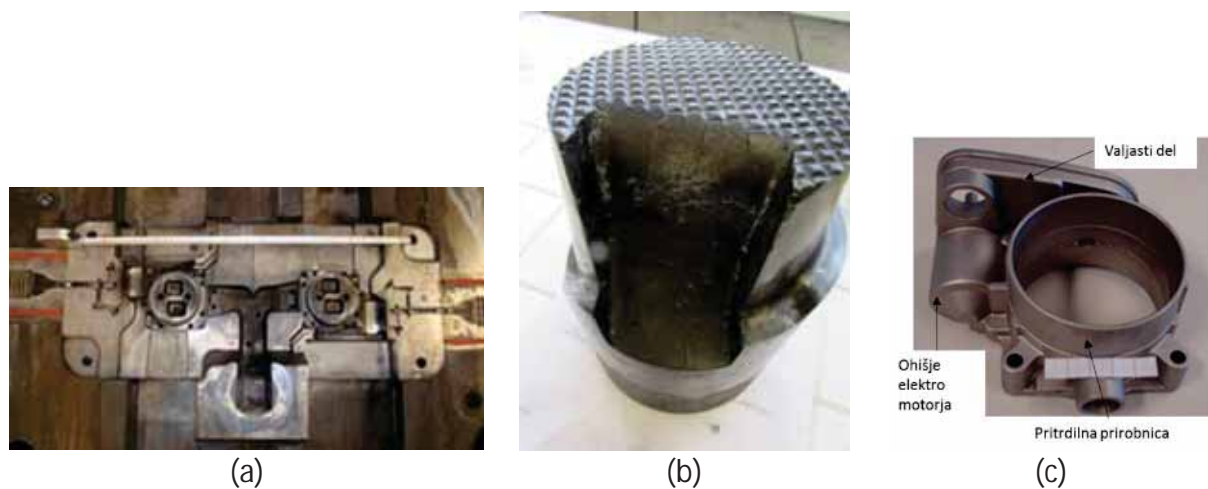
Two casting cavity HPDC tool (a), distributor (b) and the casting (c)
